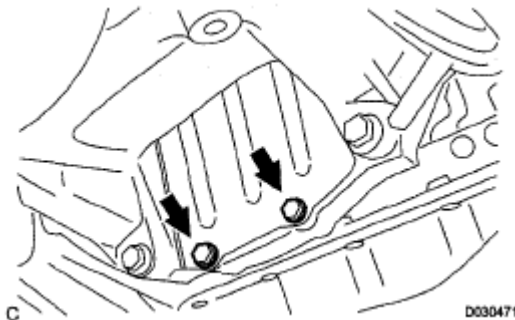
Locating Engine Mounting Bracket Bolts (Front)14. REMOVE TRANSFER STIFFENER PLATE RH
